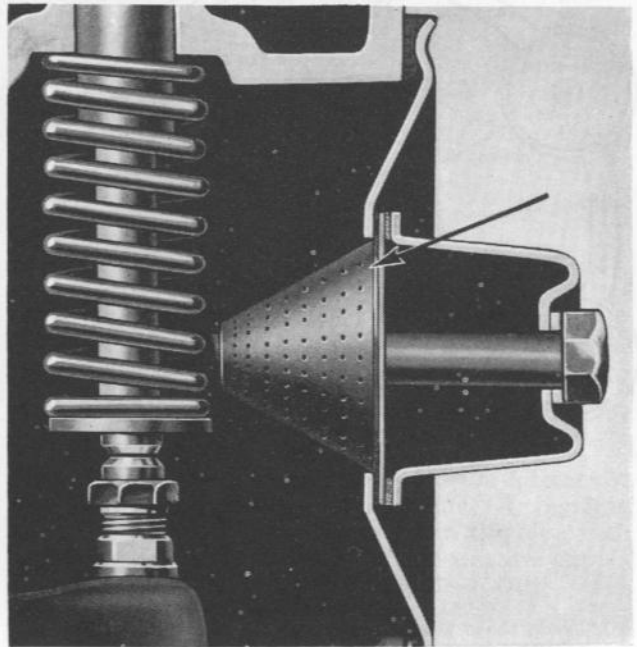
CRANKCASE VENTILATOR BAFFLE
